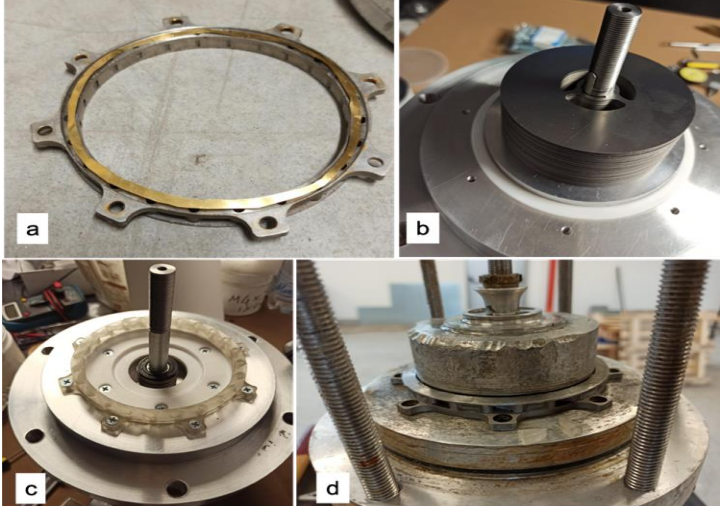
Water Tesla expander components: (a) metallic stator, (b) rotor assembly, (c) rotor with plastic stator, (d) rotor with metallic stator (balancing removals are visible)
